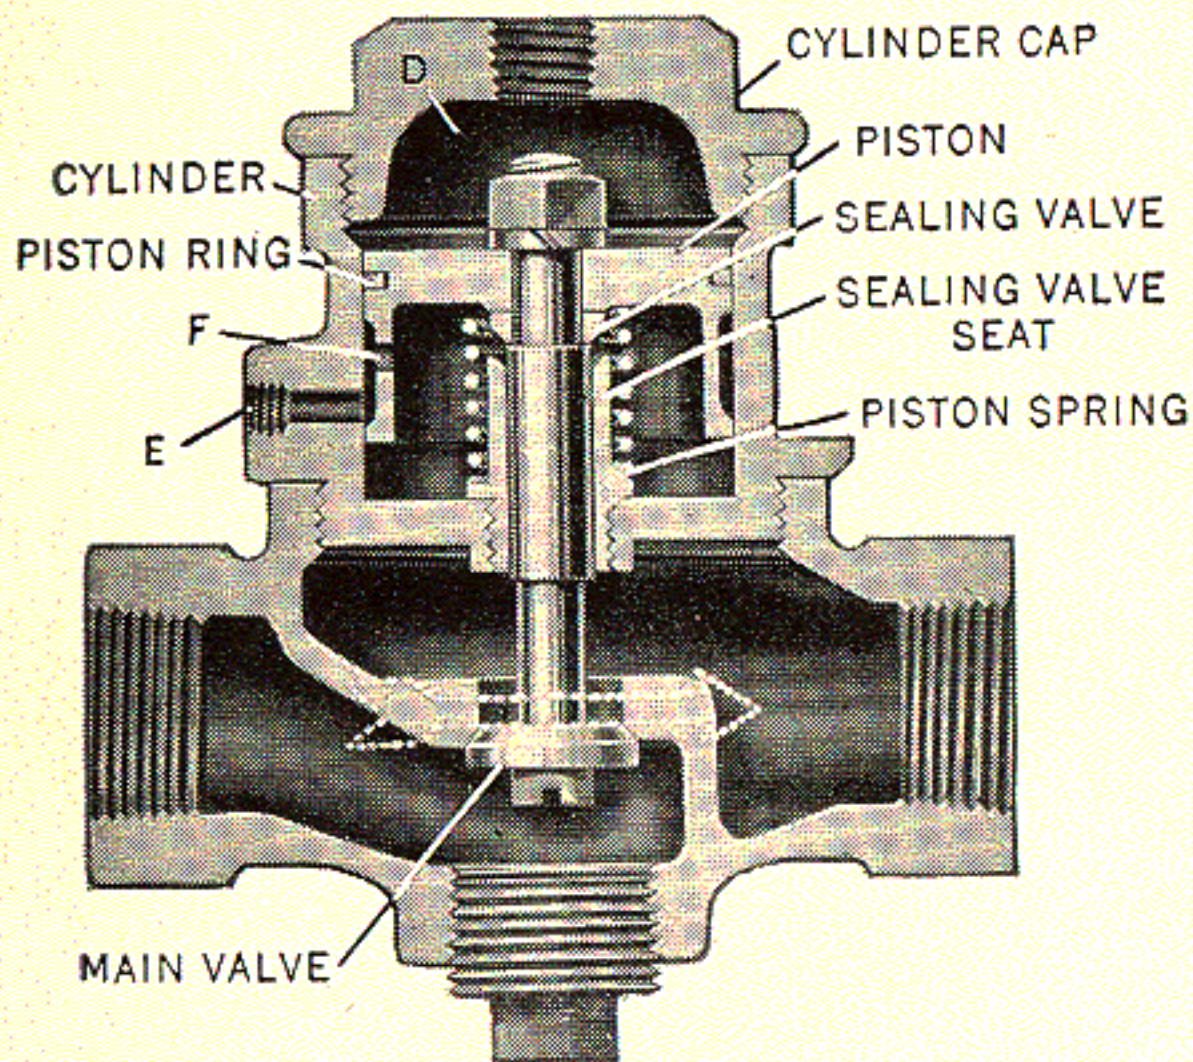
Type C-1 Booster Preliminary Throttle Valve; Release
